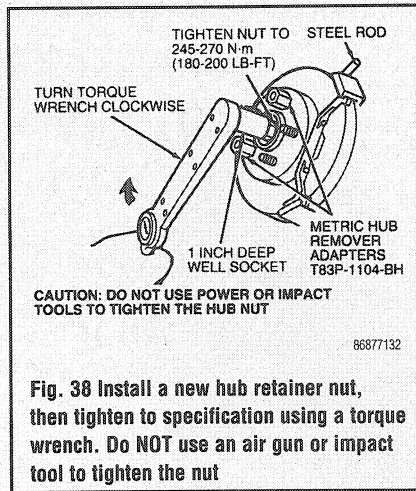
Install a new hub retainer nut, then tighten to specification using a torque wrench. Do NOT use an air gun or impact tool to tighten the nut
